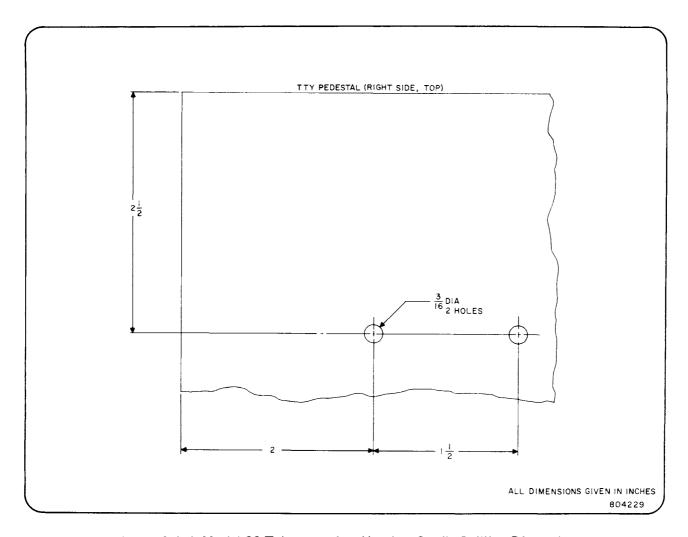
AK. Model 33 Teletypewriter Handset Cradle Drilling Dimensions
